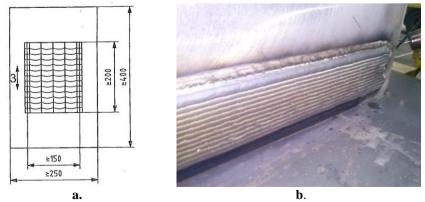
Plate for experimental study of cladding technology: a) plate geometry; b) as deposited Inconel 625 overlay
